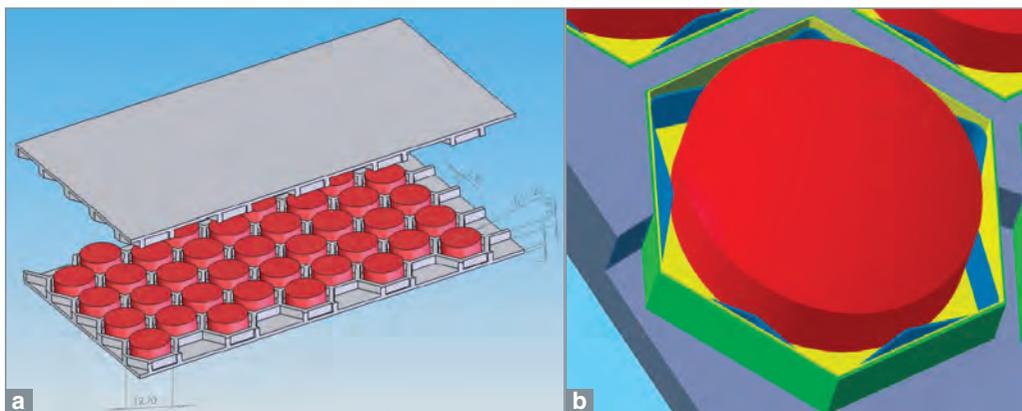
(a) Exploded view of a GFR macrostructured fuel plate; (b) detail view of a cell.
